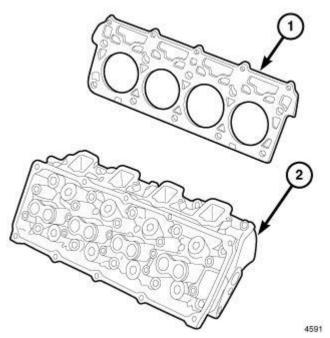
Cylinder Head Components Courtesy of CHRYSLER LLC
